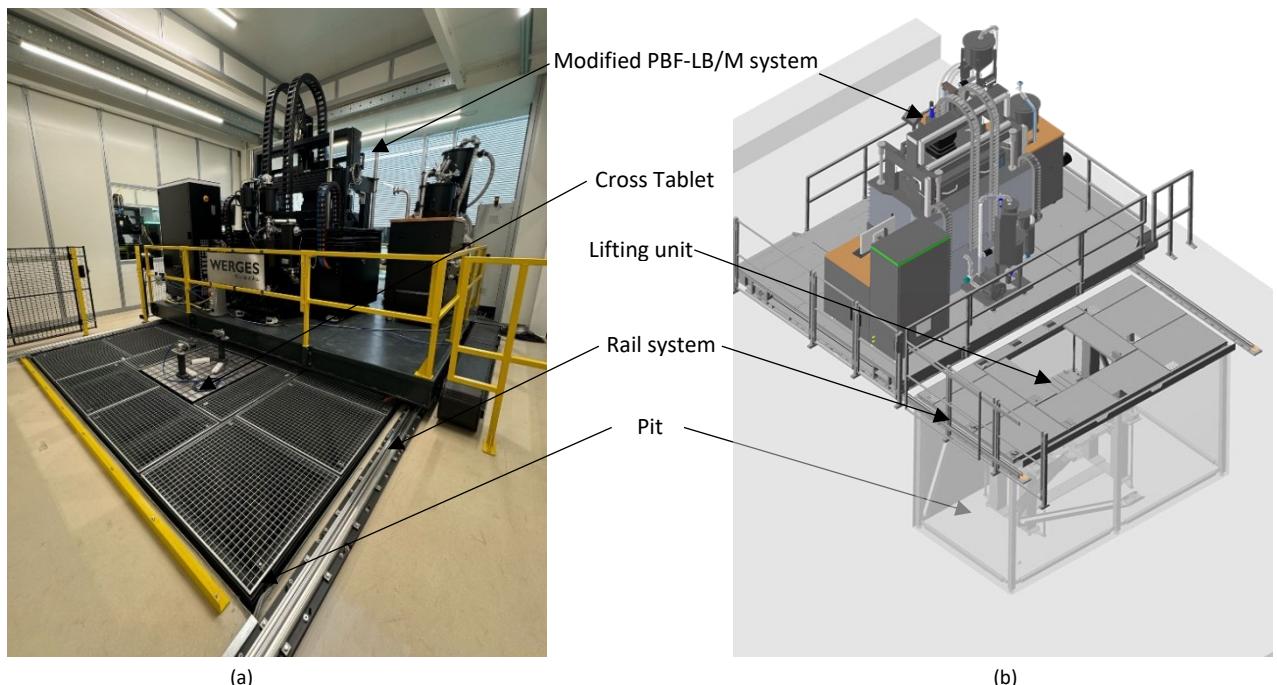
Technical Setup of the Large-Scale Additive Manufacturing System; (a) Isometric View from the Process Chamber Side; (b) Isometric View from the Front of the PBF-LB/M
